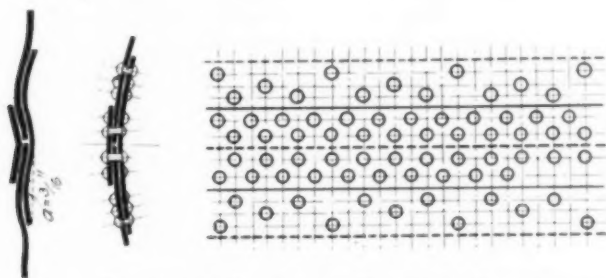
BUTT JOINT TESTED TO DESTRUCTION
